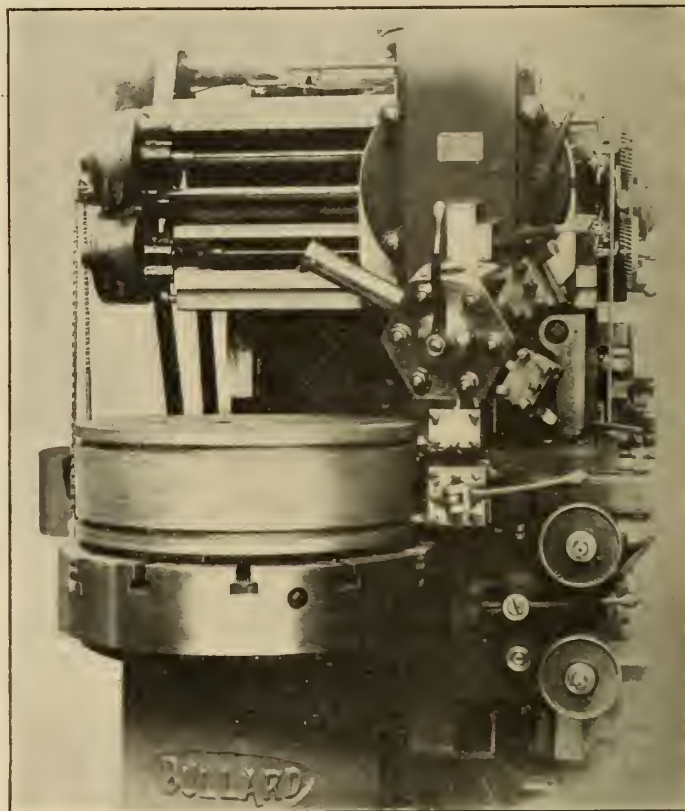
Thirty-six-inch Vertical Turret Lathe, Machining Piston Heads.
